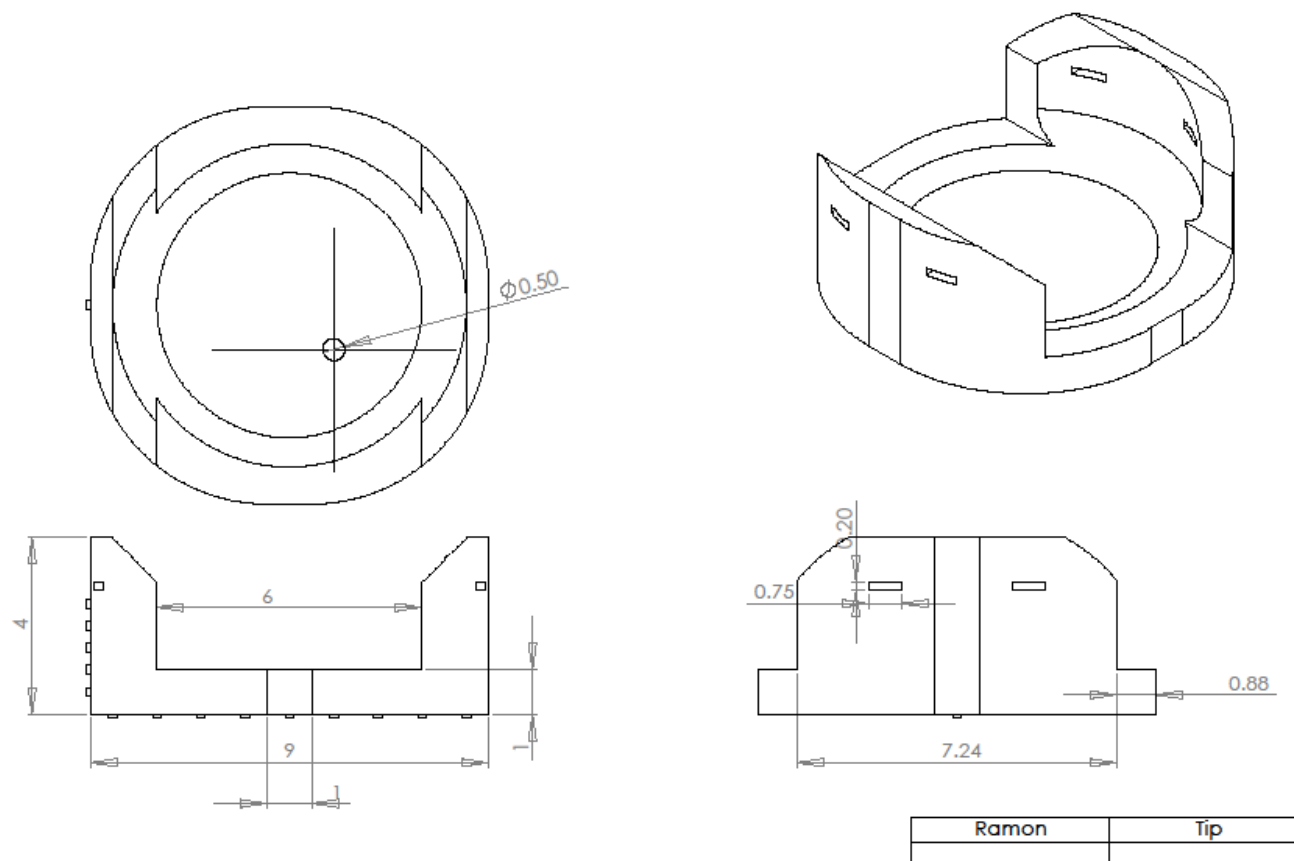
CAD drawing of the Tip of the 2-DOF sensor.
